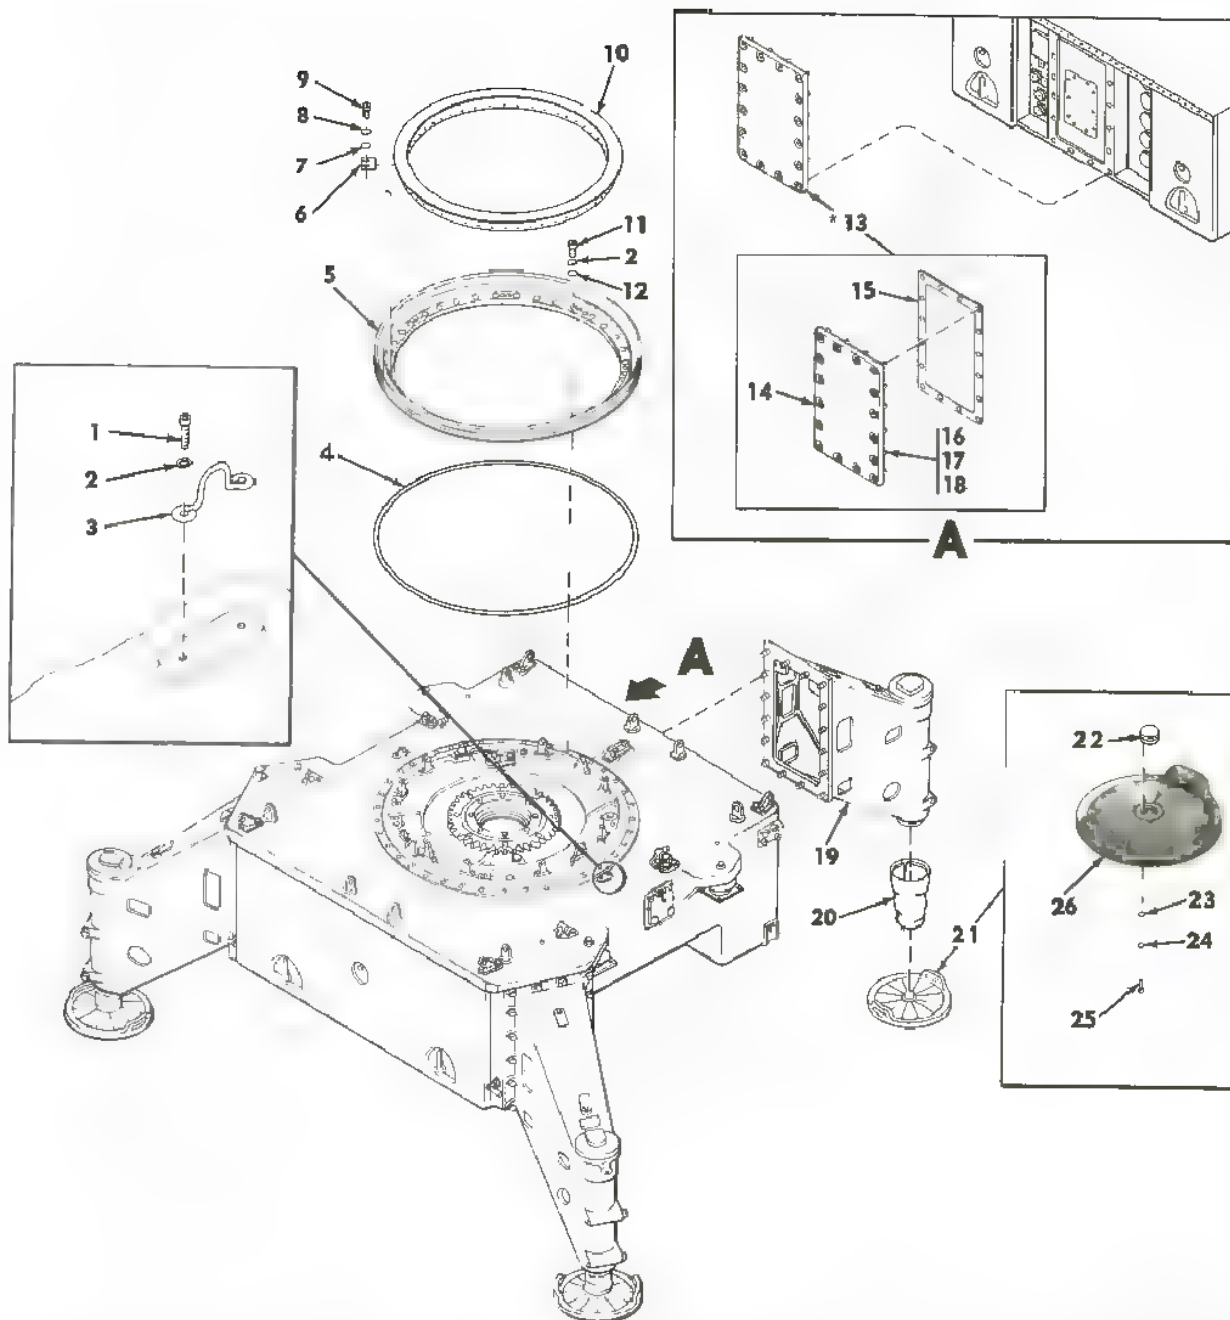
PLATFORM, ANTENNA SUPPORT BASE /9136463/-EXPLODED VIEW
